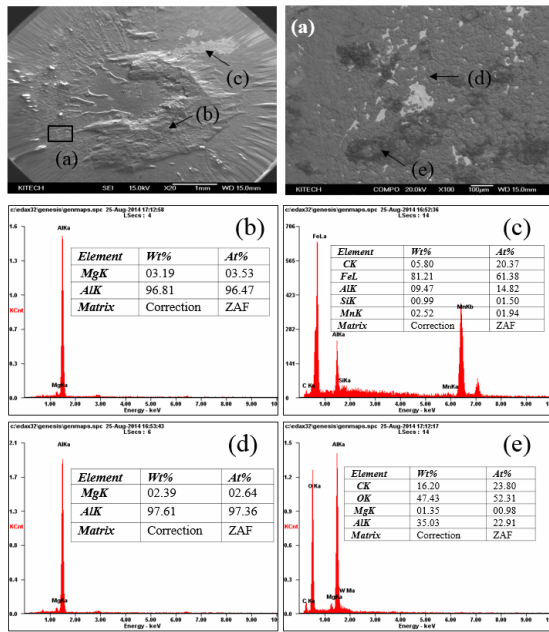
SEM images and results of the EDS analysis of the surface fractured weld zone.
